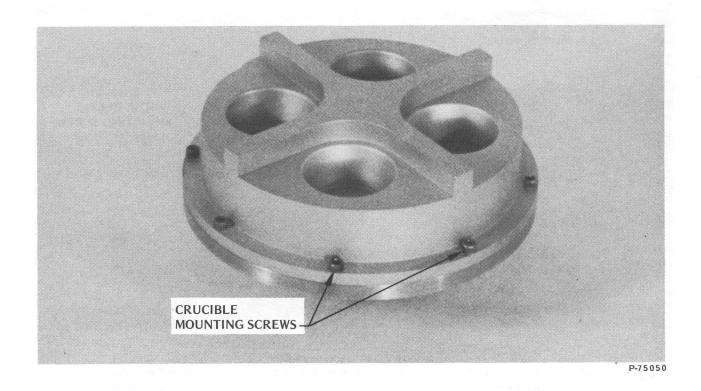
Unscrew the eight crucible mounting screws and lift the crucible off the mounting flange.
